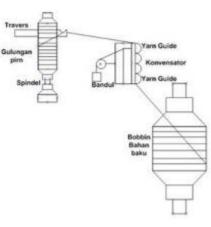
Thread path (passing) on the Pirn Winder machine.
